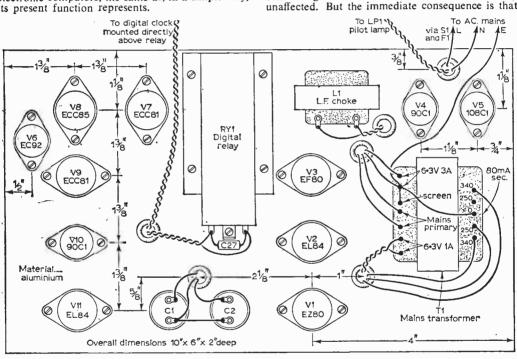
Above-chassis layout and wiring, showing main drilling dimensions.
